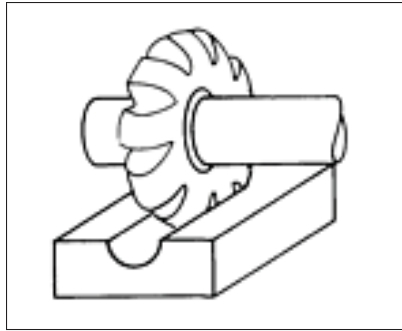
This sketch depicts the milling in the fabrication of a part.
